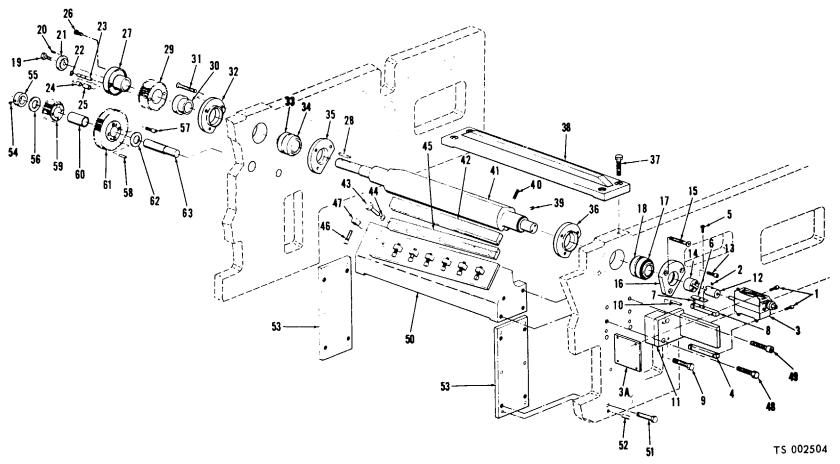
Slowdown sheeter alignment assembly (Sheet 1 of 7). 4-105
